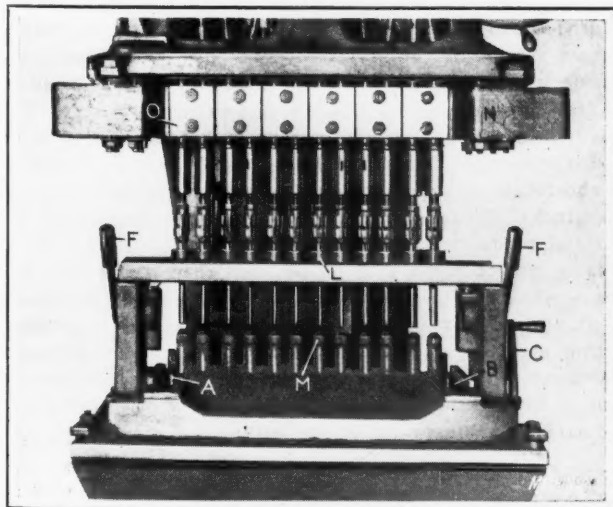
Jig for reaming Twelve Guide Holes and Openings in the Top of the Cylinder Block
